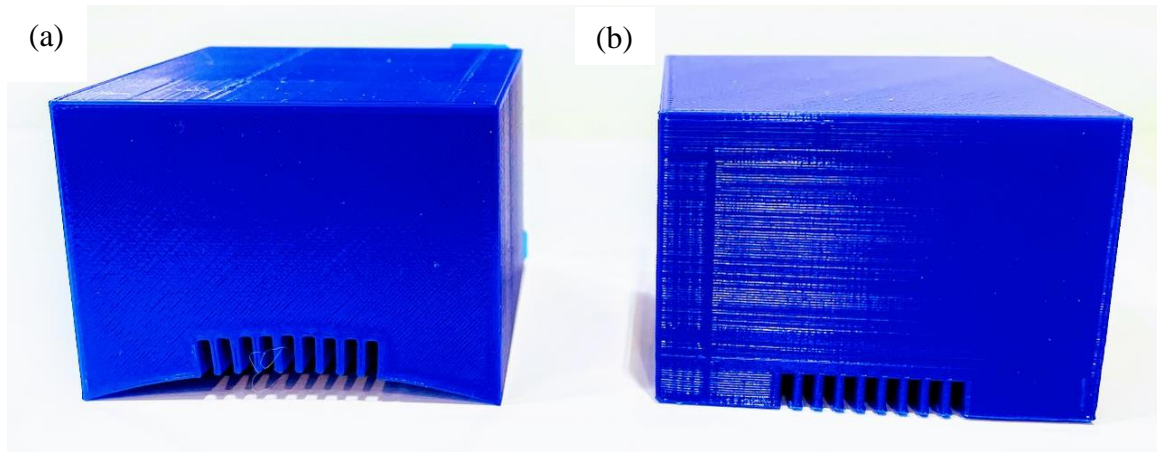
(a) The Ref circuit probe holder for curved surfaces, and (b) the Ref circuit probe holder for flat surfaces.
